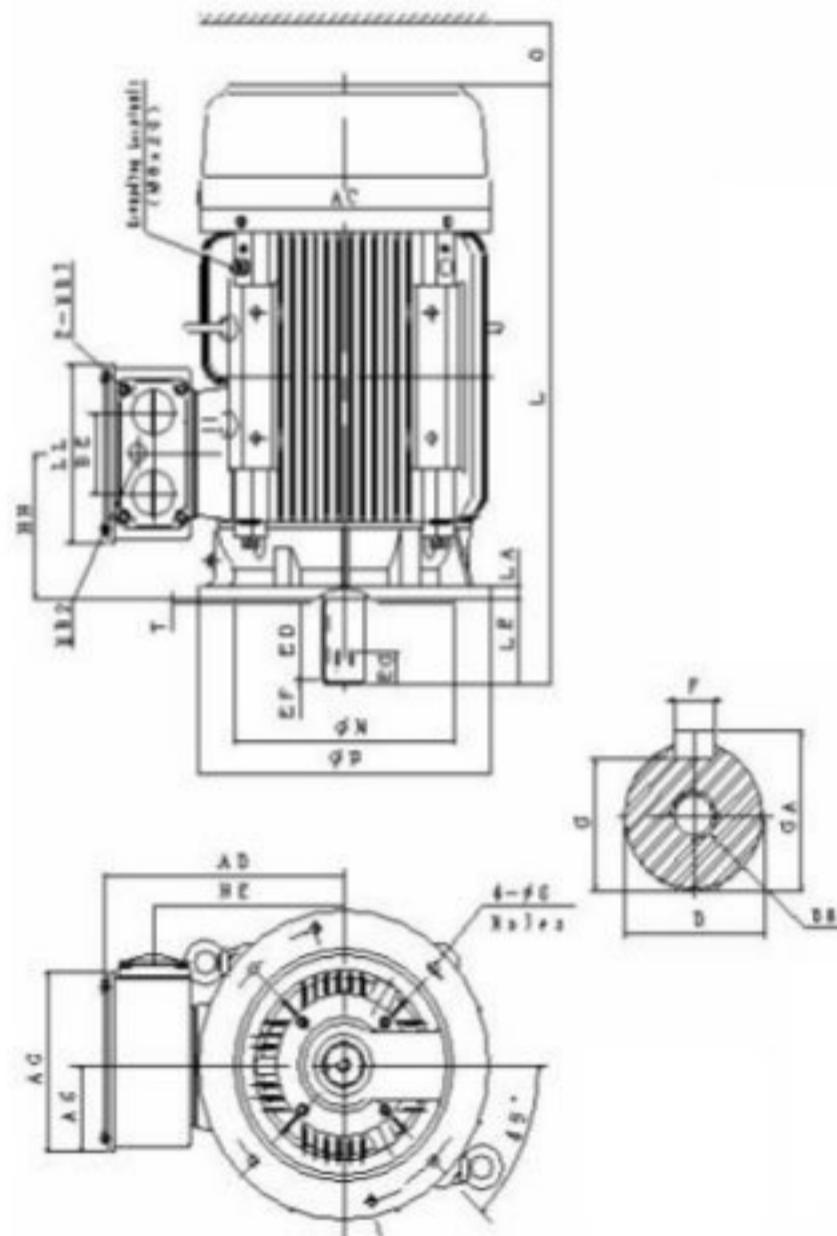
Outline drawing of cast iron design, mounting V1; frame size 200
